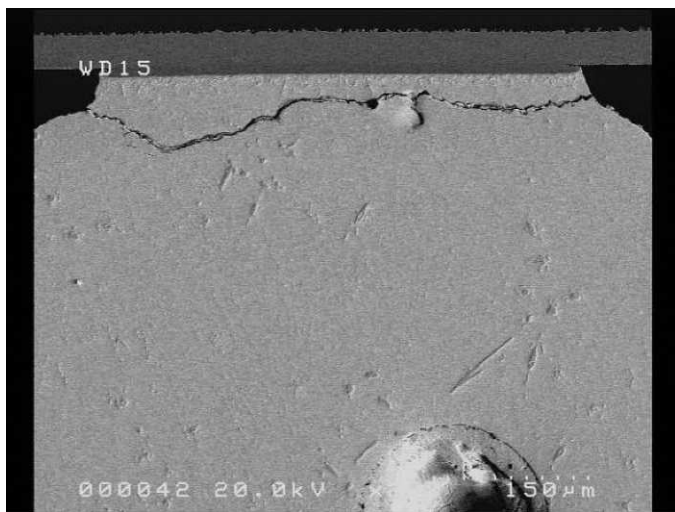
Component side failure with SAC305 solder on OSP finish (170°C T_g board).
